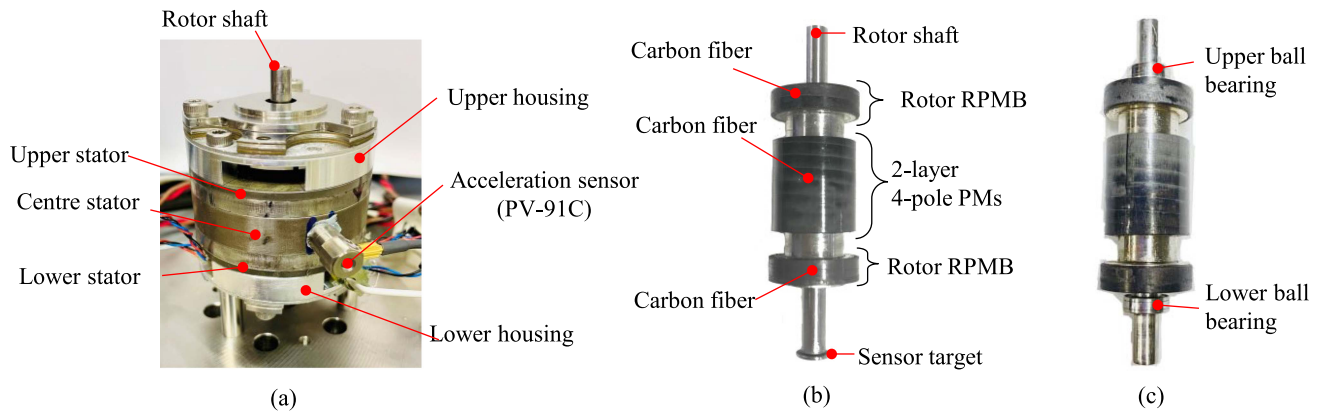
Prototype of the test motor: (a) assembled motor, (b) rotor shaft with RPMB, and (c) rotor shaft with ball bearings.
